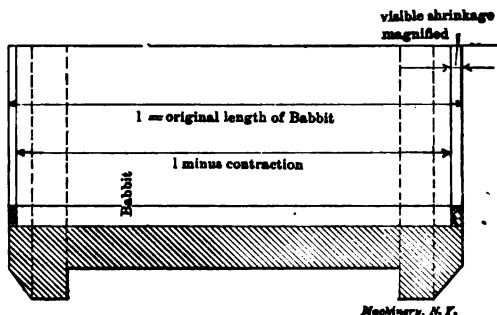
Babbitt Bearing without Dove-tailed Grooves or other Retaining Device
